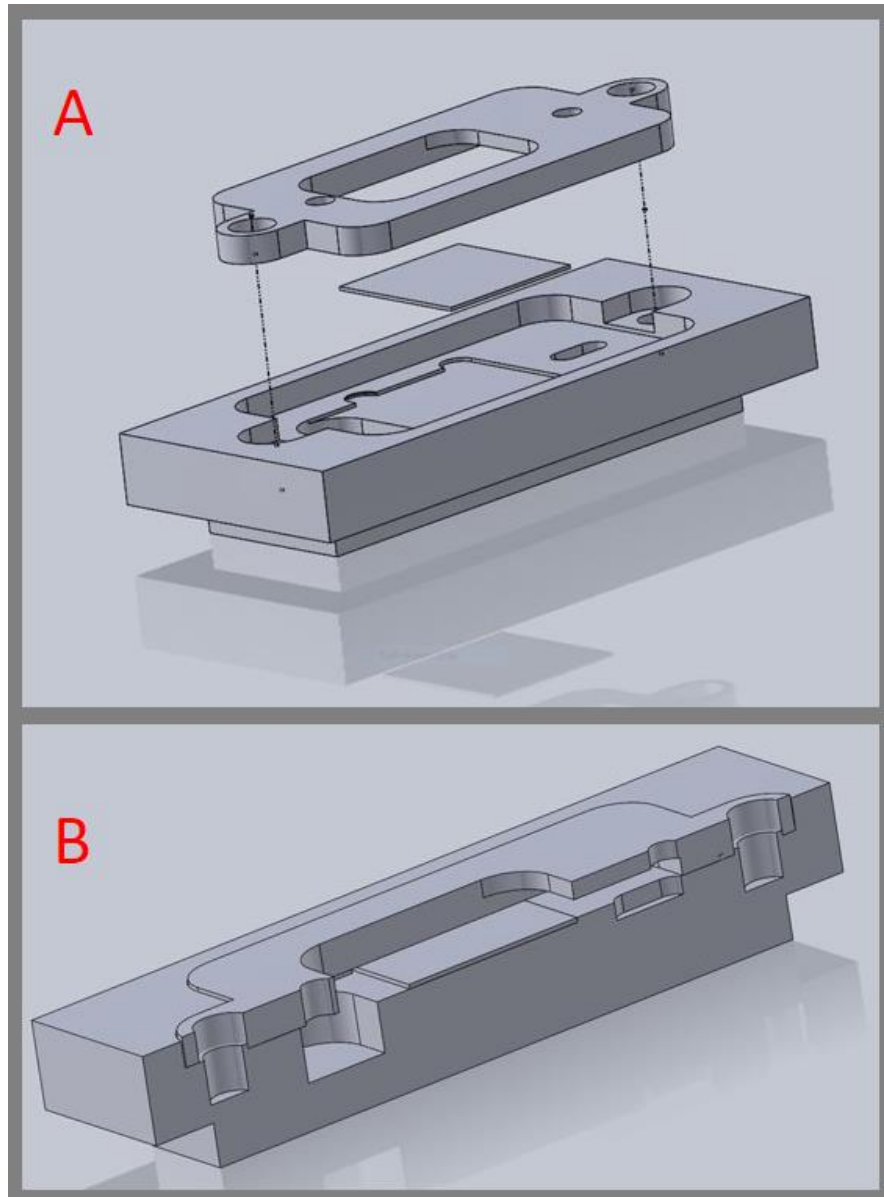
Flow chamber engineering drawings: Drawing of the flow chamber base (A) and top (B). The drawings were taken to the Lancaster University Engineering Department workshops and produced using precision milling to a tolerance of +/- 10  $\mu$ m.
